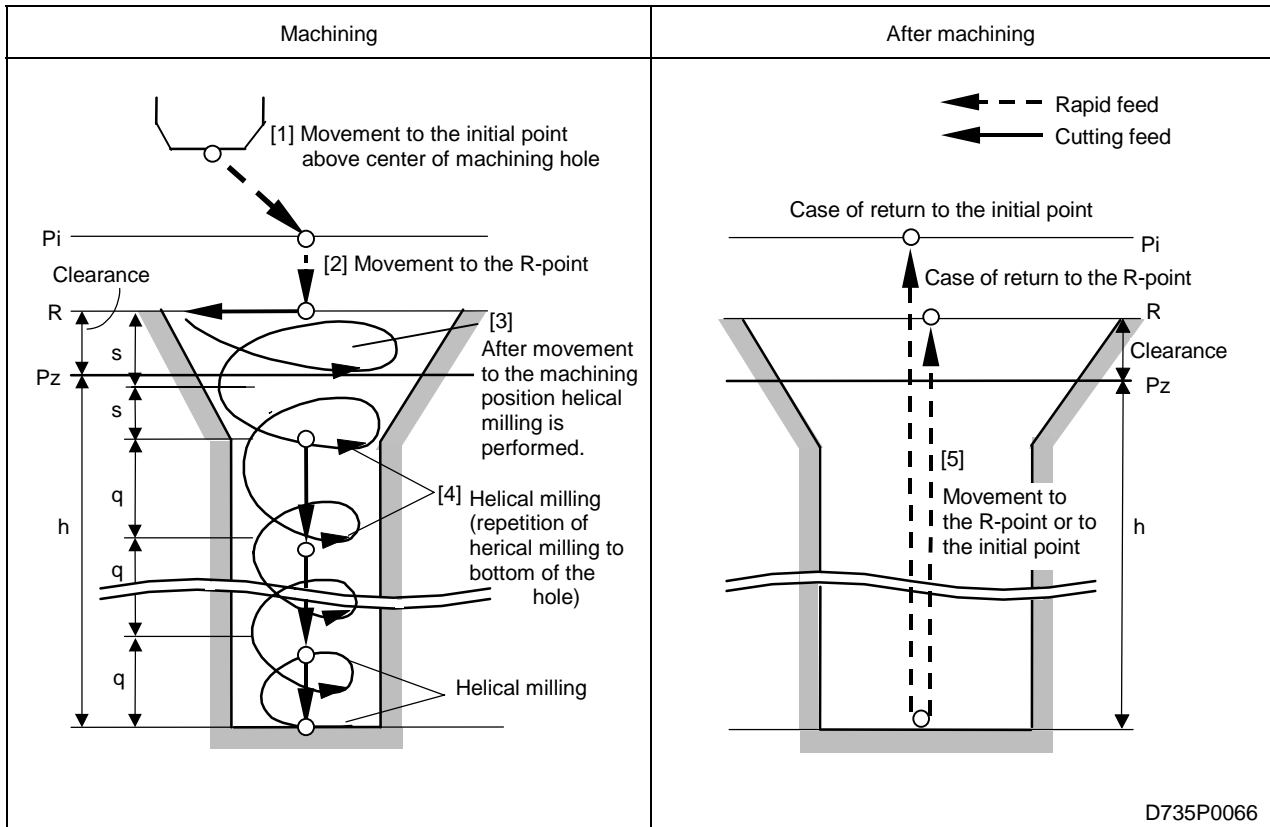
Circular milling-B (case of shortening in chamfering)
